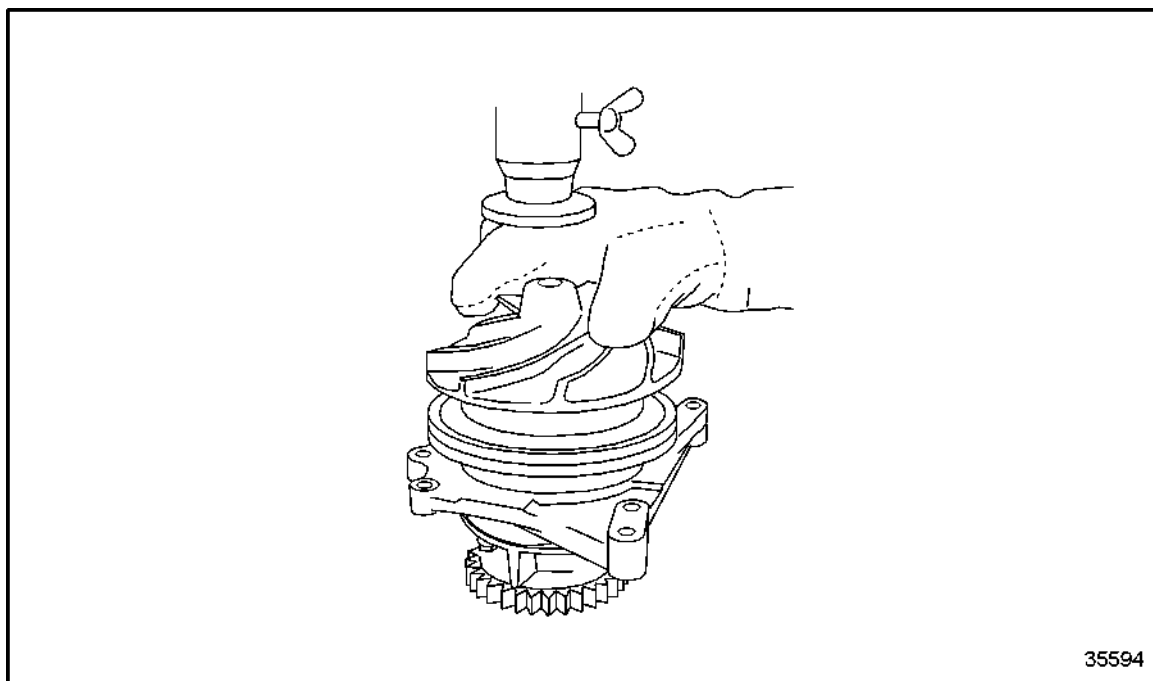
Placing Preheated Impeller on Pump Shaft
